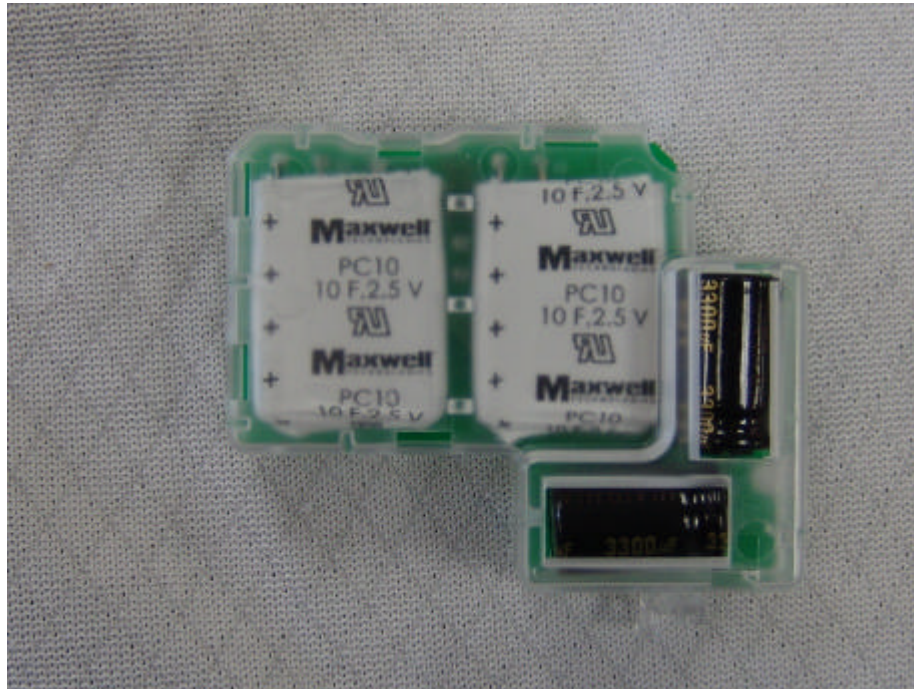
SmartSynch Capacitor Bank Board (CCB) – Front View
